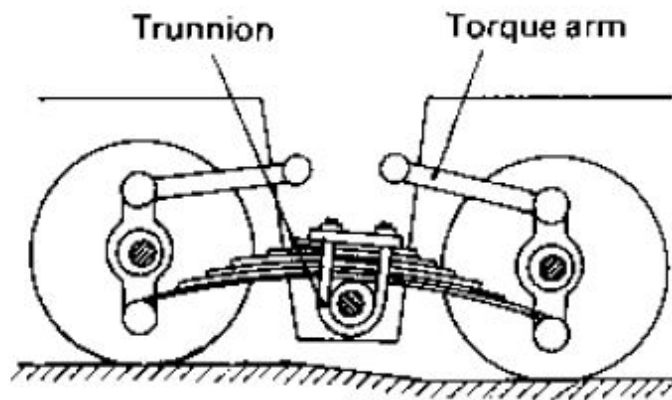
Low mounted single inverted semi-elliptic spring with upper torque rods
